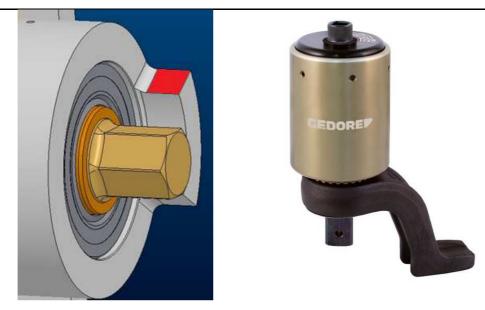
Torsional shaft with hexagon and housing (left) and torque multiplier (right) [19]
